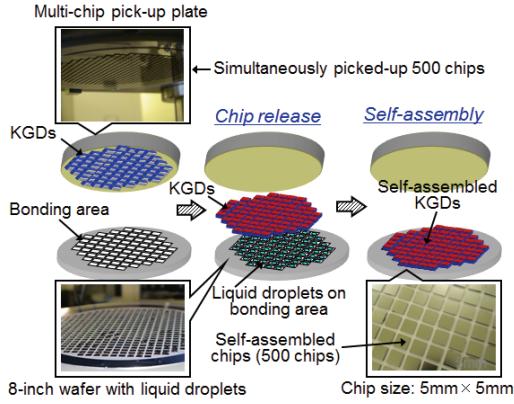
Self-assembly process using a self-assembly machine for 8-inch wafer.
